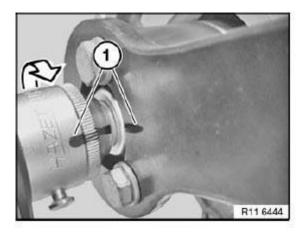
Identifying Special Tools With Colored Line Courtesy of BMW OF NORTH AMERICA, INC.
